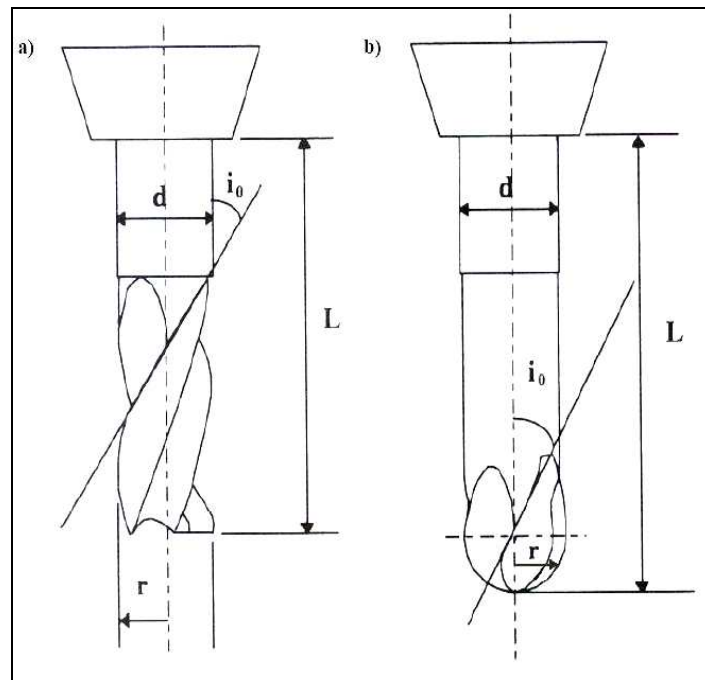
Macro geometries of a) End mill, b) Ball end mill from Guzel [34].
